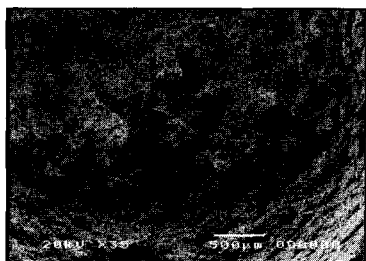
Fracture surface at 500℃ (223202cycles)
